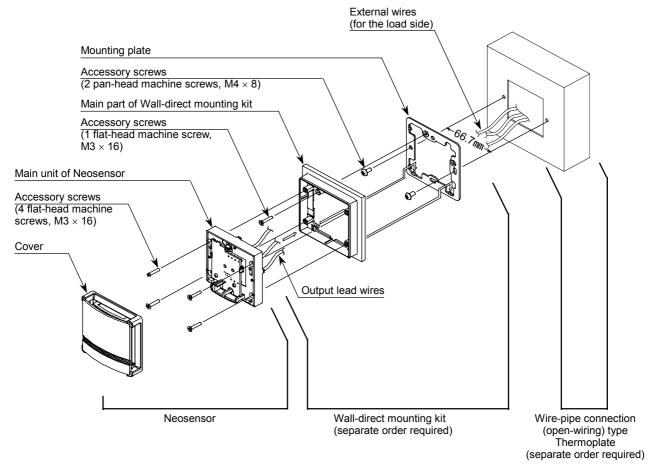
Installation: Neosensor with Wall-direct mounting kit (on conduit connection type Thermoplate)
